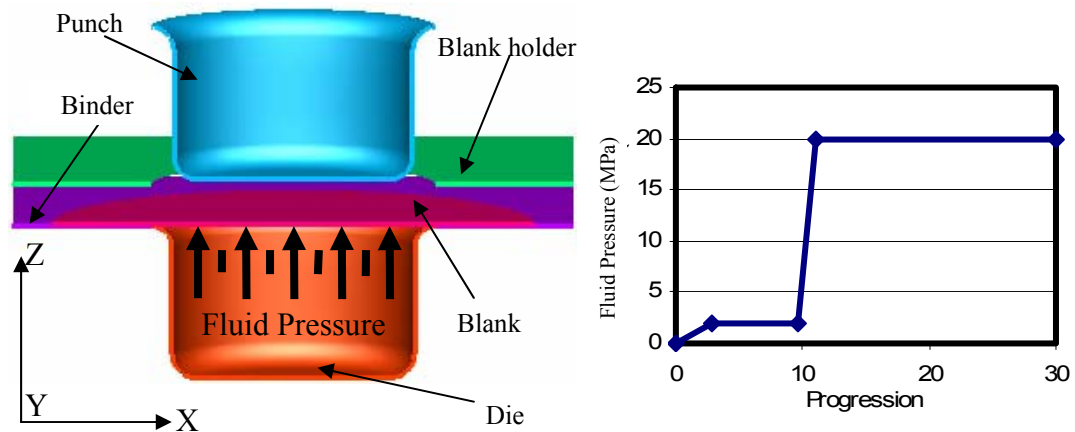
Hydro-mechanical deep drawing (aquadrawing) setup and counter pressure exerted by fluid on to the workpiece
